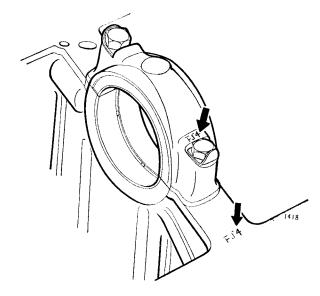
Showing the corresponding numbers marked on the main bearing cap and crankcase.
